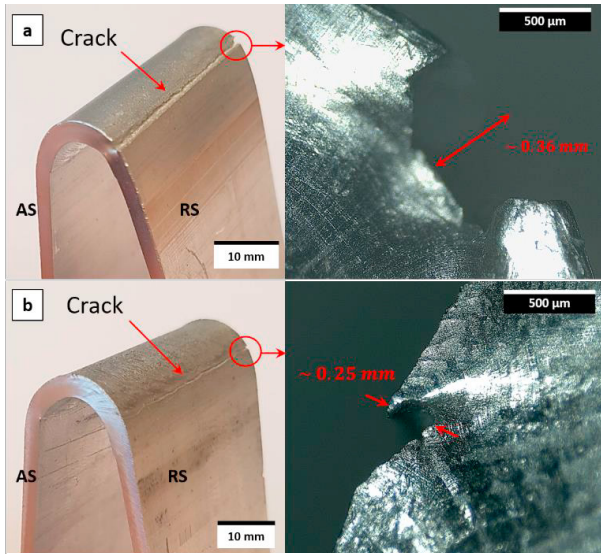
Photographs of the weld root specimens along with close-ups of the root cracks detected on the retreating side of the weld following bend testing; (a) Start region of weld, (b) Central part of weld.
